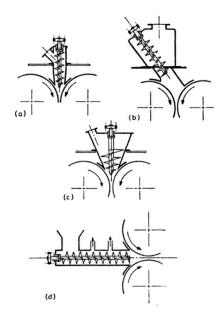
Some typical screw feeders: (a) vertical straight or slightly tapered screw feeder, (b) inclined straight screw feeder, (c) vertical tapered screw feeder, (d) horizontal straight screw feeder [23]
